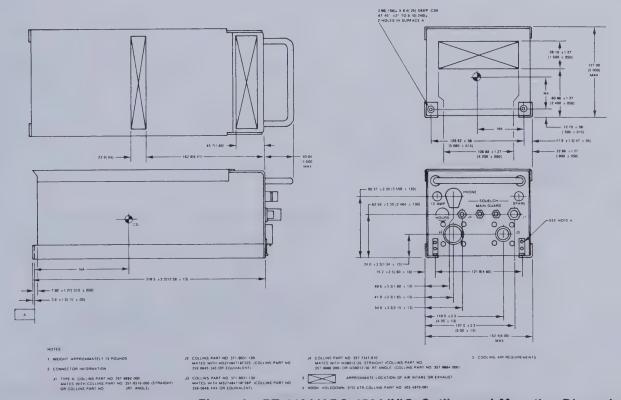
RT-1194/ARC-159A(V)5, Outline and Mounting Dimensions
